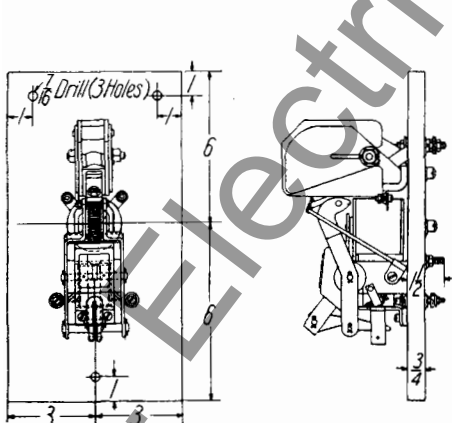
SINGLE BREAK TYPE S-1 RELAY
